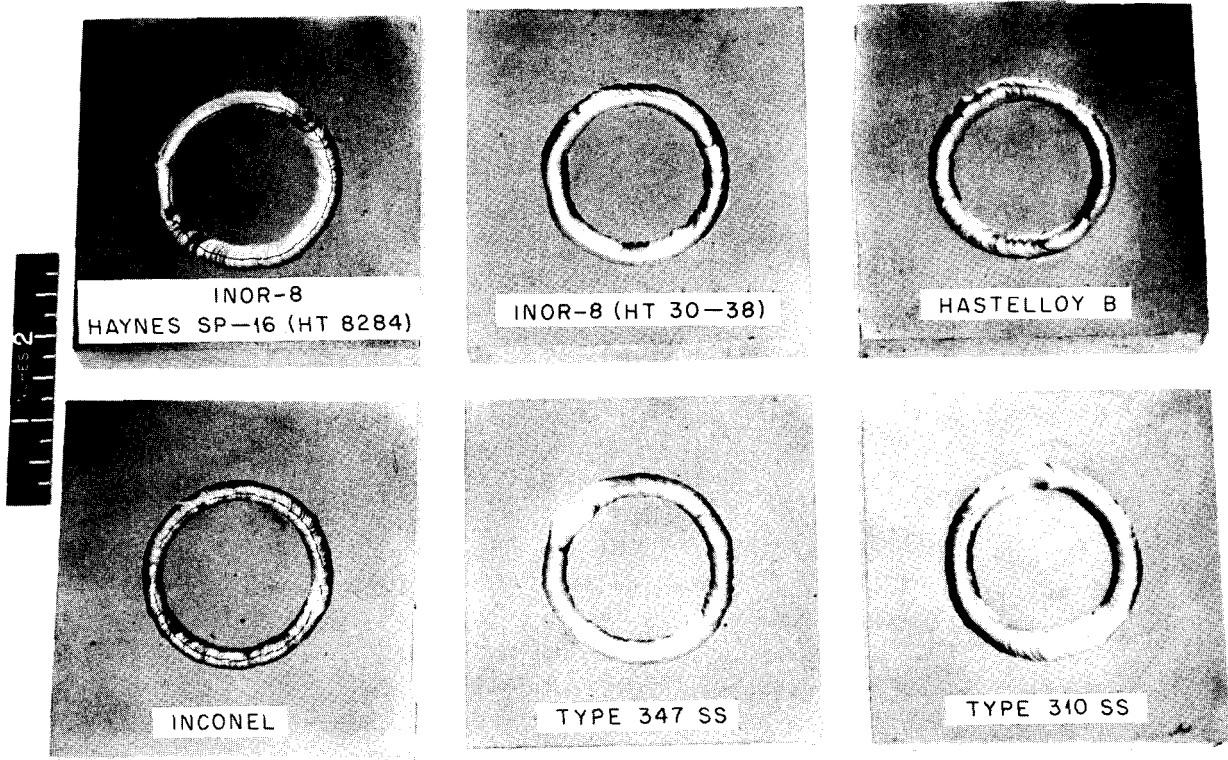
Circular-Groove Test Specimens for Studying Weld-Cracking Susceptibility.
